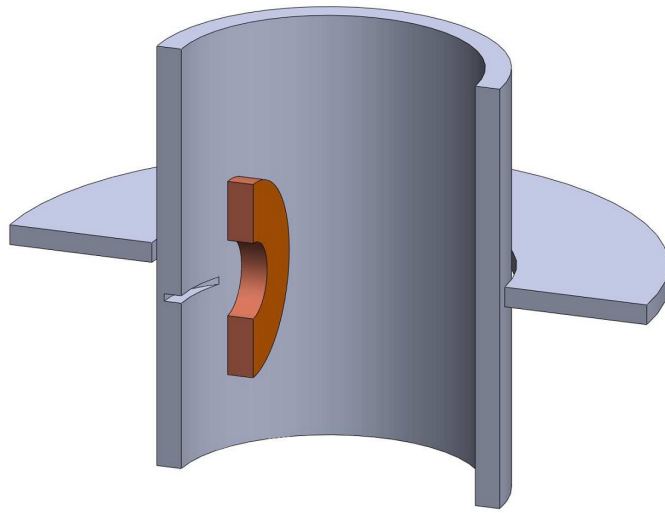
Rotary pancake coil inside a tube with a crack near to a support plate.
